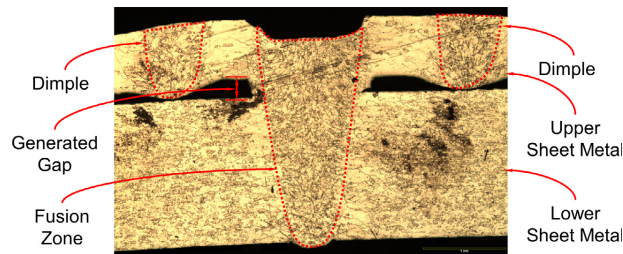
Micro-section of laser welded joint with laser dimpling technique.
